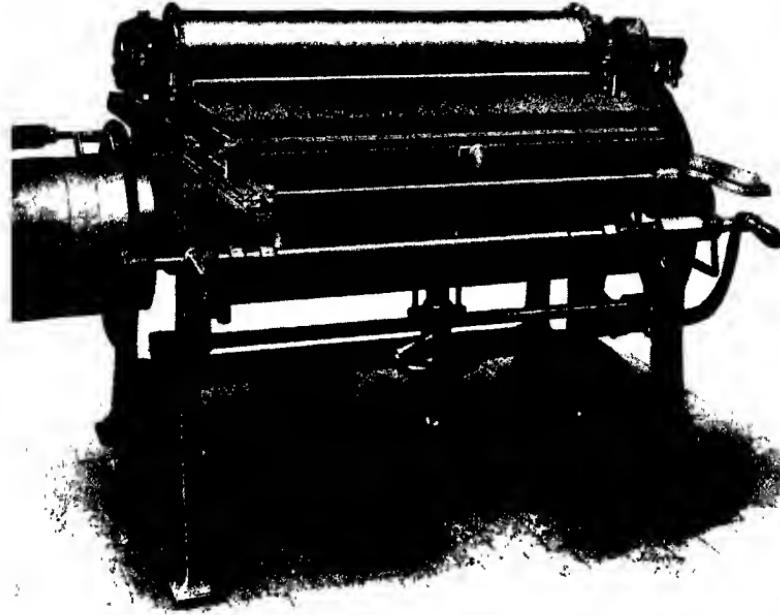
SELF-REVERSING BLOCKING MACHINE.
